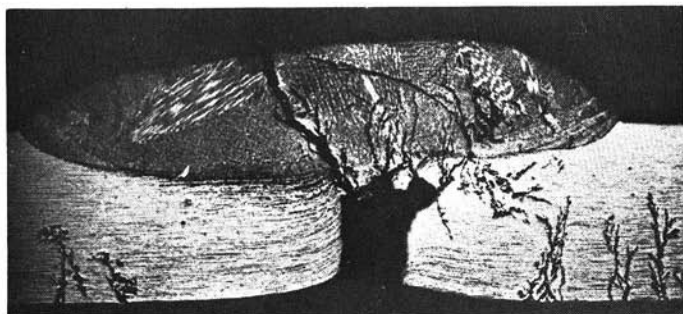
Stress corrosion cracking in and near wrongly laid weld in stainless steel after 600 hours in a hot chloride solution.
